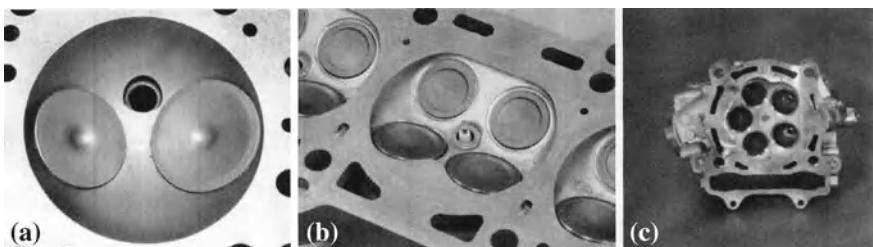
Combustion chambers for cross-flow cylinder heads: a hemispherical two valves; b pent-roof with four valves; c with five valves
